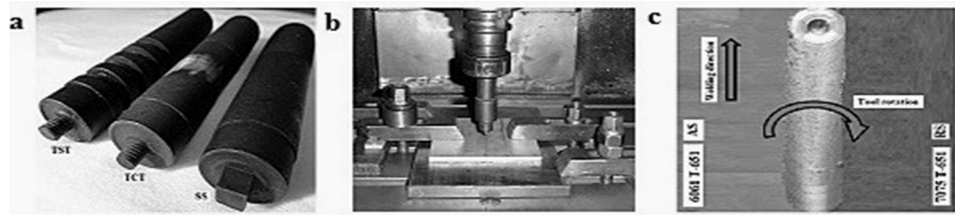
(a) Tool pin profiles, (b) FSW set up, (c) Typical welded plate by FSW process
